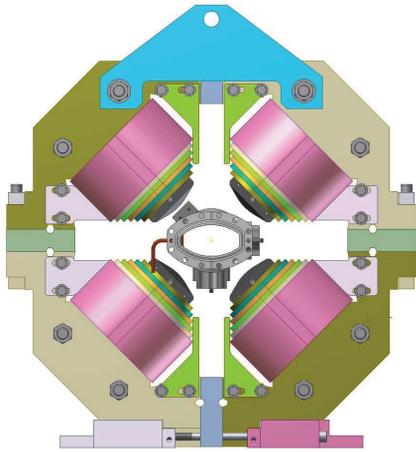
Schematic drawing of the vacuum chamber installed in the quadrupole magnet.
